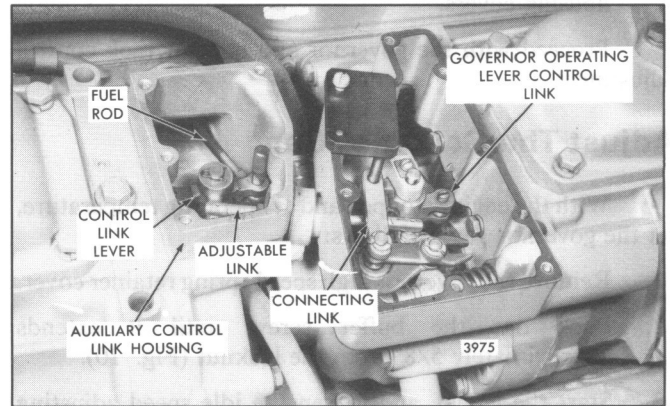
Positioning Control Link Levers with Tools J 21779 and J 21780
